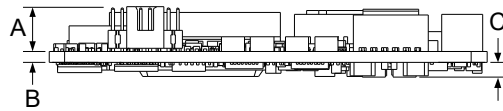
XETK-S23.0 Dimensions - Side View
